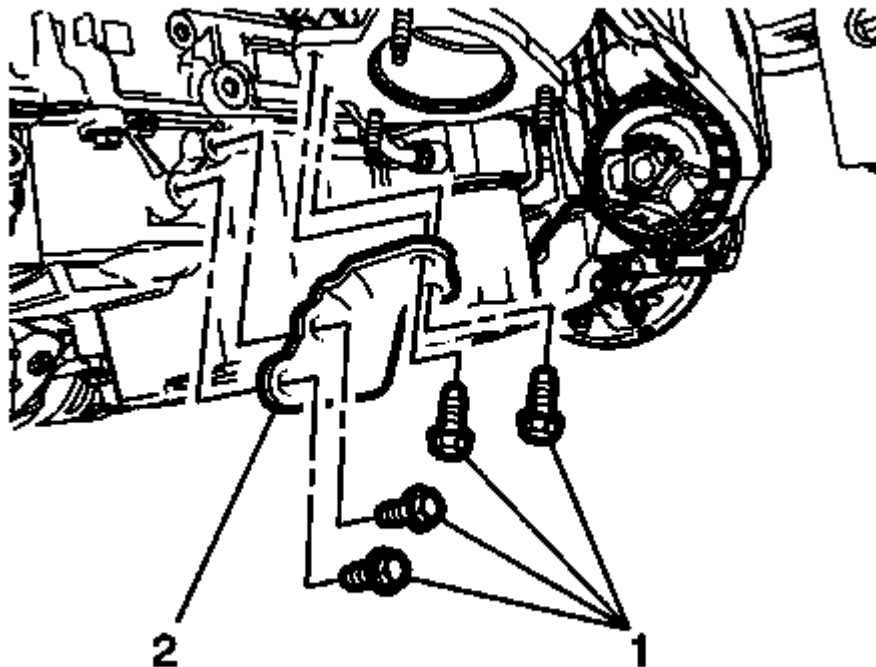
Catalytic Converter Lower Brace & Fasteners
